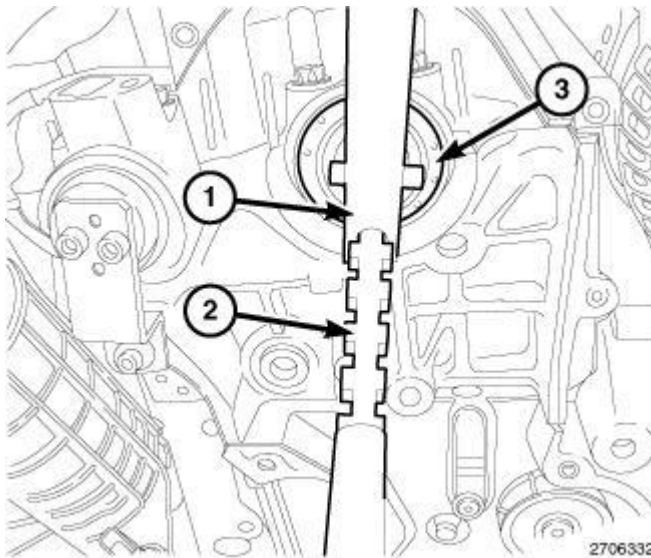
Seal Remover Handle, Seal Remover & Intake Camshaft Oil Seal
